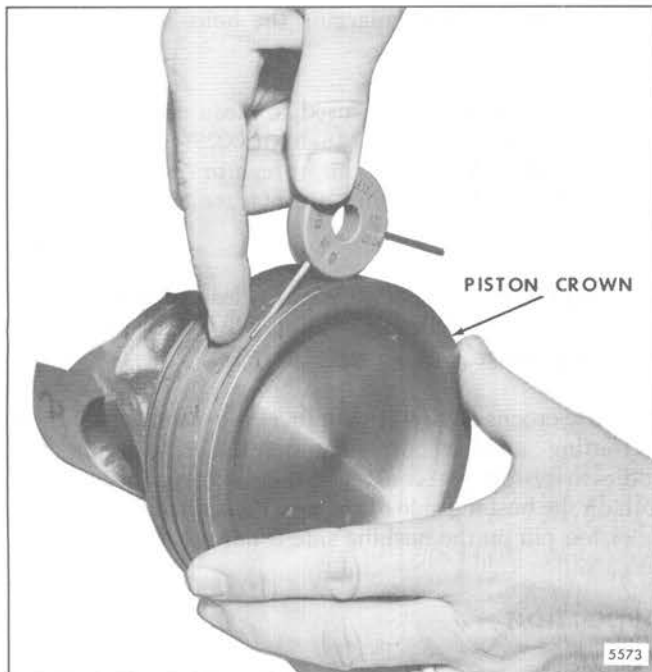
Checking Fire Ring Groove in Piston Crown with Tool J 24599
